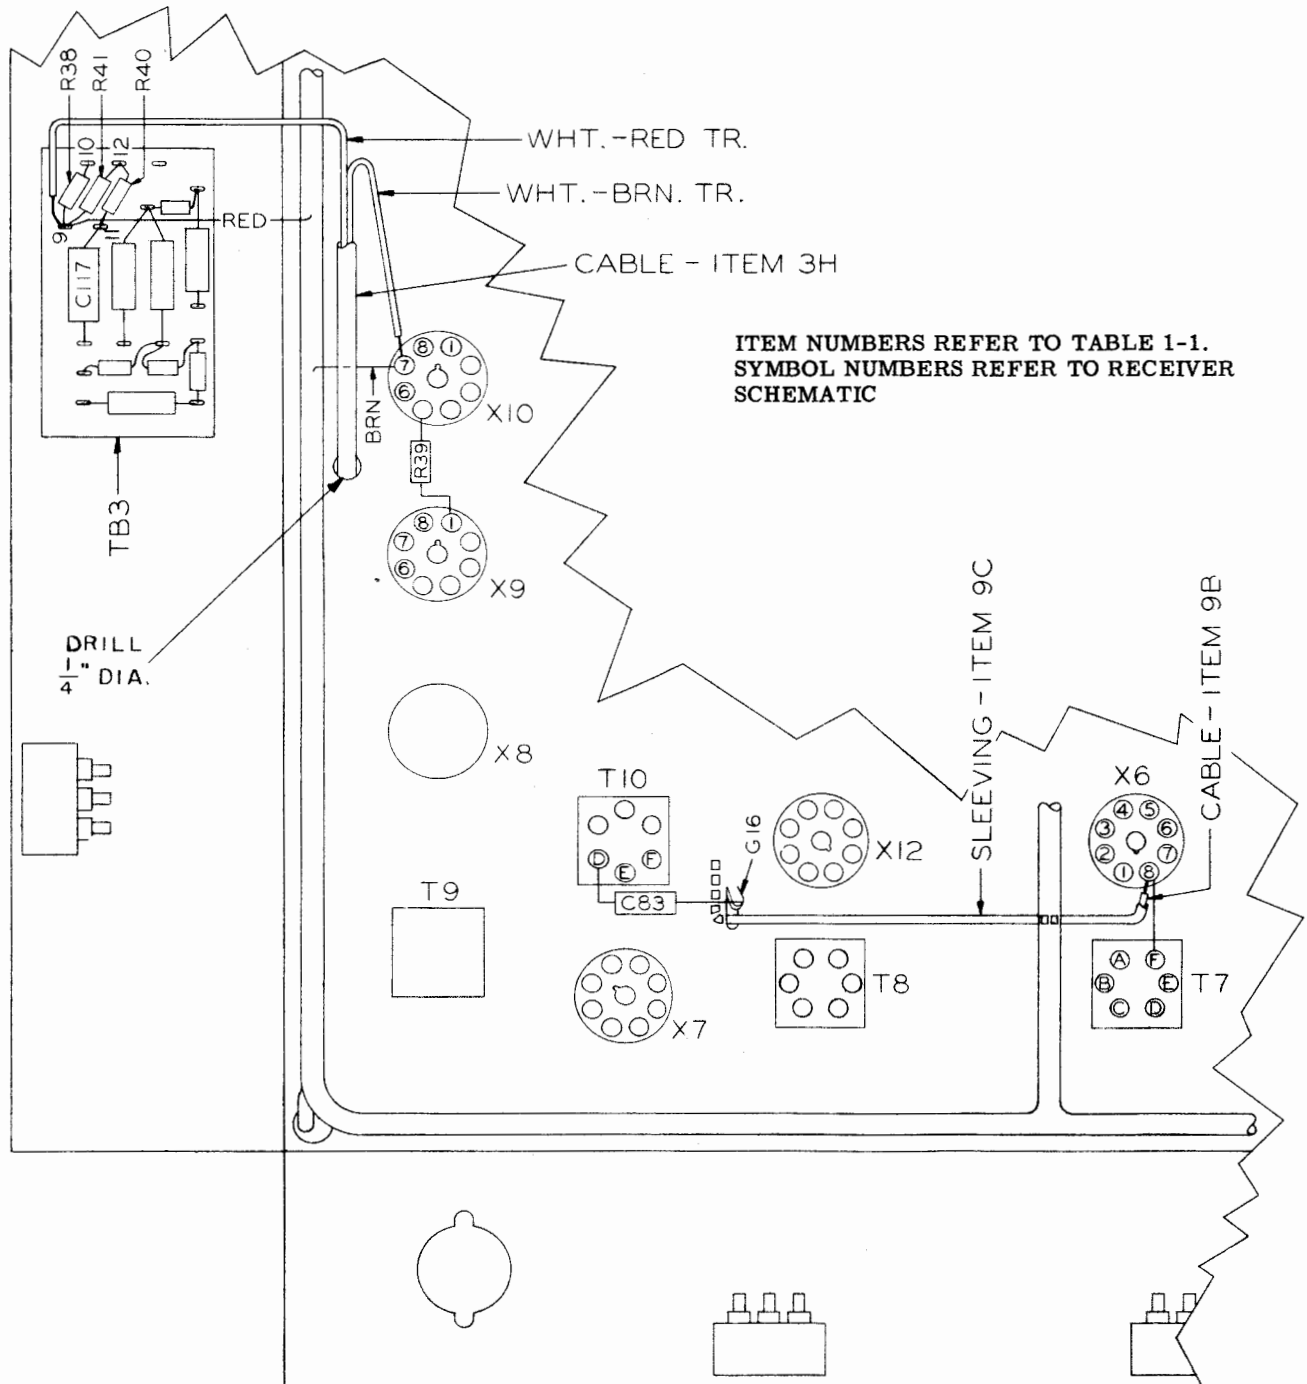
Receiver Coupling Kit Installation on RDM Receiver, Wiring Side of Chassis
